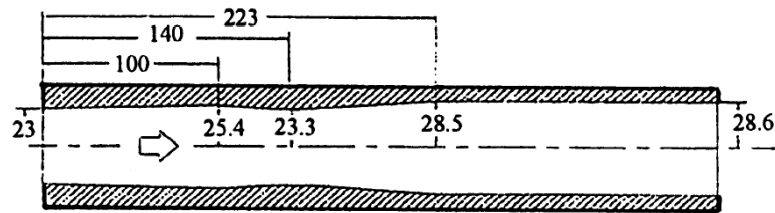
Profile of test tube used (all dimensions are in millimeters). (After Novak and Sarpkaya 2000)
